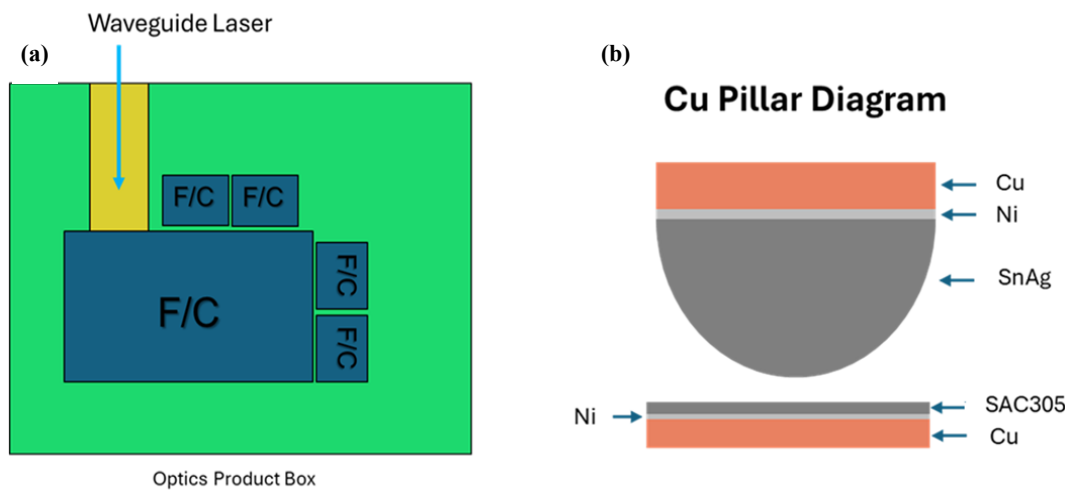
(a) Top view schematic of optoelectronic product with assembled Cu pillar flip chip on board (b) structure of Cu pillar and substrate before soldering.
